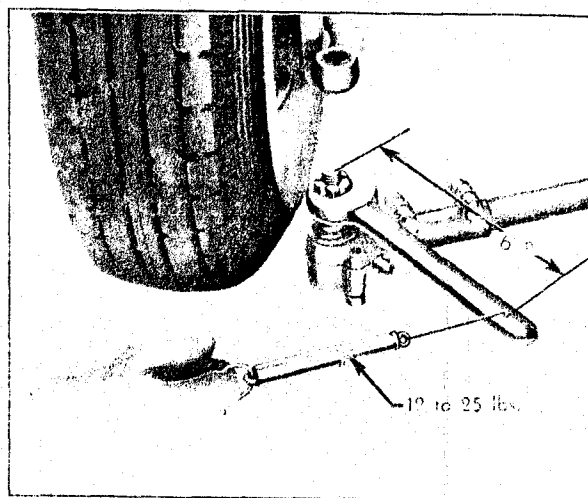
A pull of 12 to 25 pounds at the end of a 6 in. wrench should be necessary to turn the pivot in the socket at the cross-rod joints
